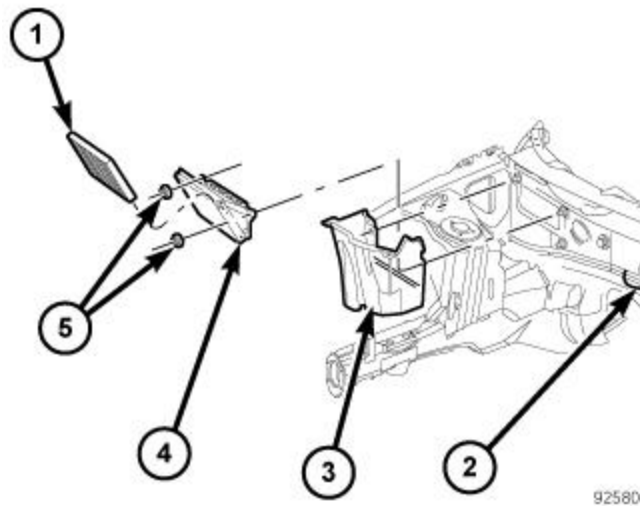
Air Inlet Housing, Cabin Air Filter, Filter Housing, Dash Panel & Nuts
